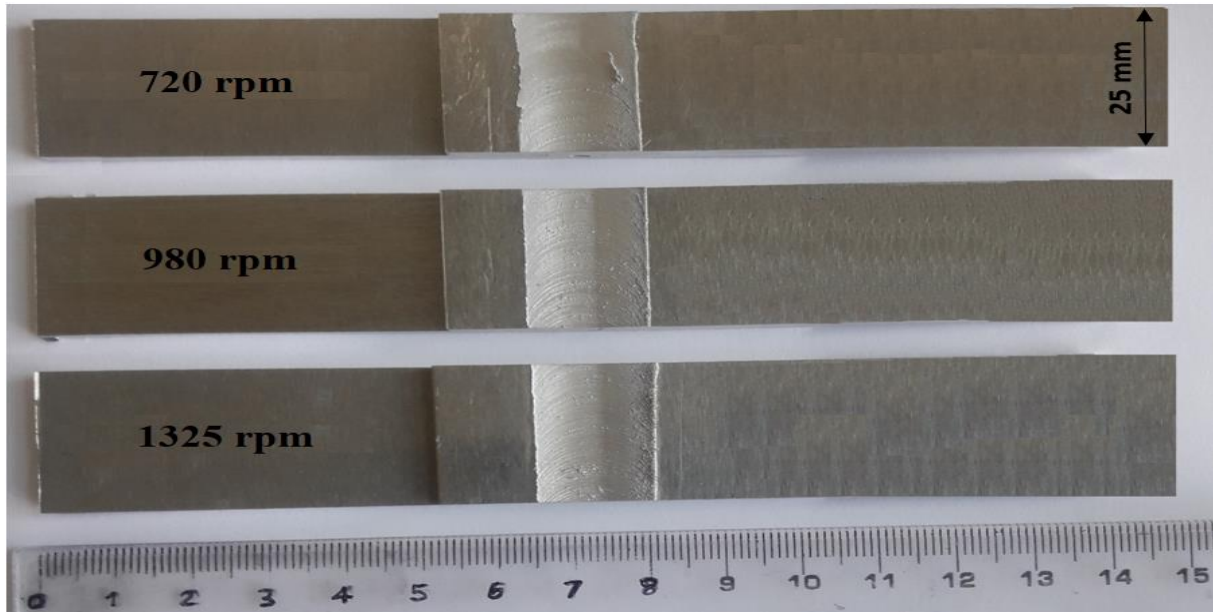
Tensile samples and dimensions of the FSLW welds produced at different tool rotation speeds
